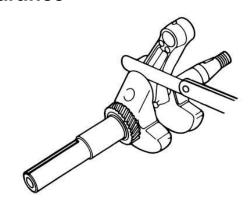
Connecting Rod Big End Side Clearance Measurement
